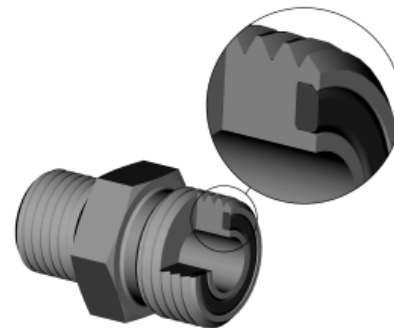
Captive O-ring Groove (CORG) Cutaway
